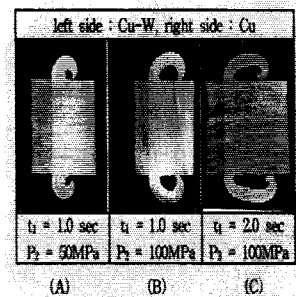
Macrostructure of Cu-W/Cu friction welds($\times 0.9$)
